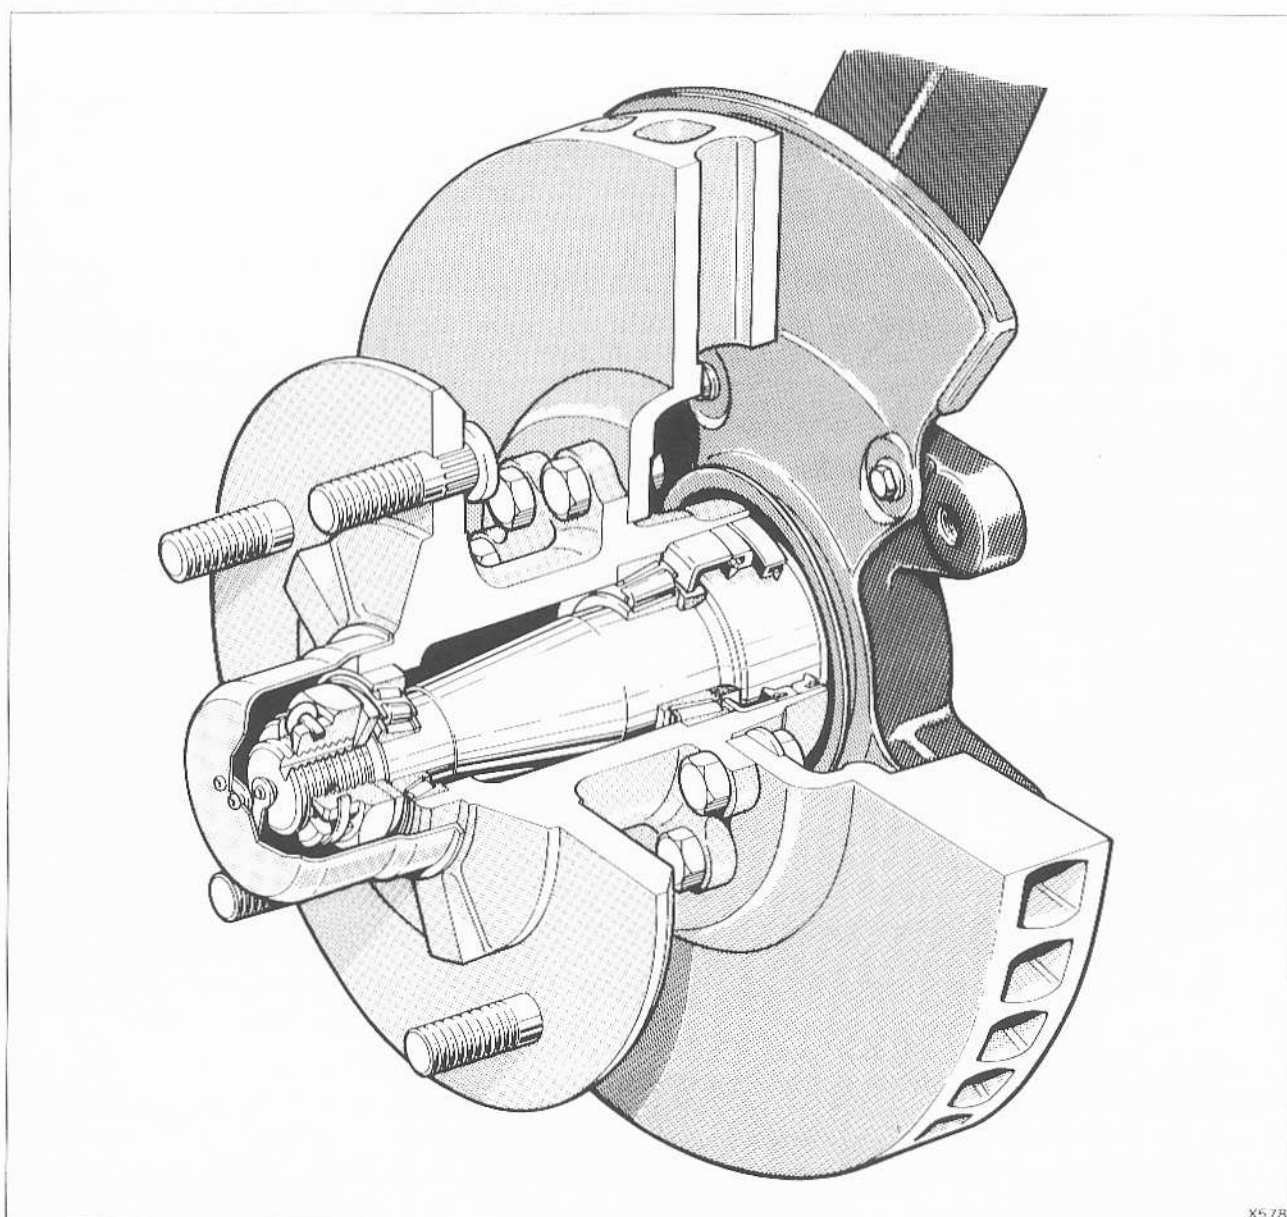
Front hub assembly (Cars not fitted with anti-lock braking)
